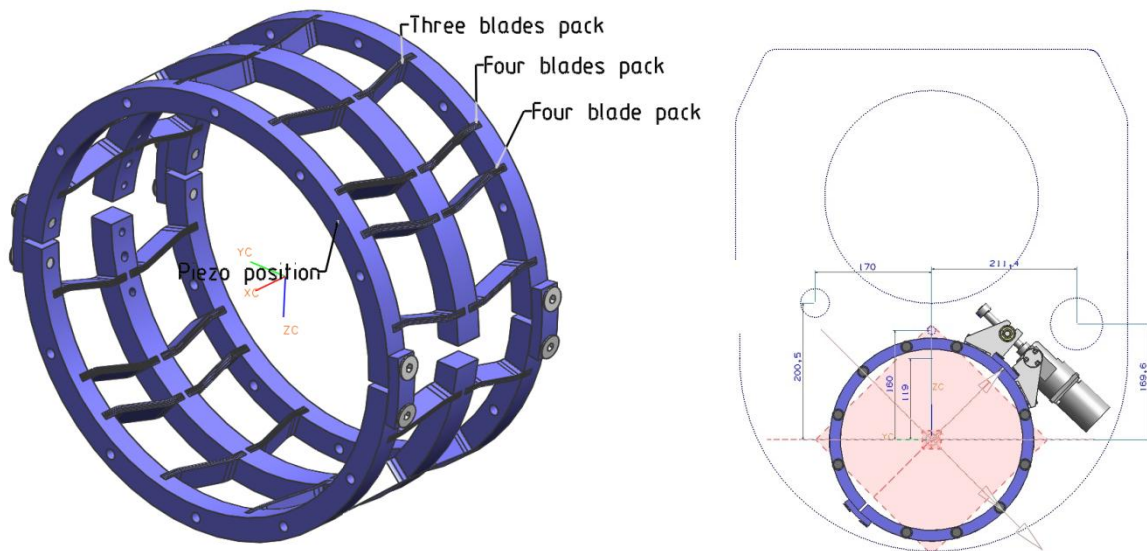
the final Blade Tuner design (left) and its revised positioning inside the cryomodule
